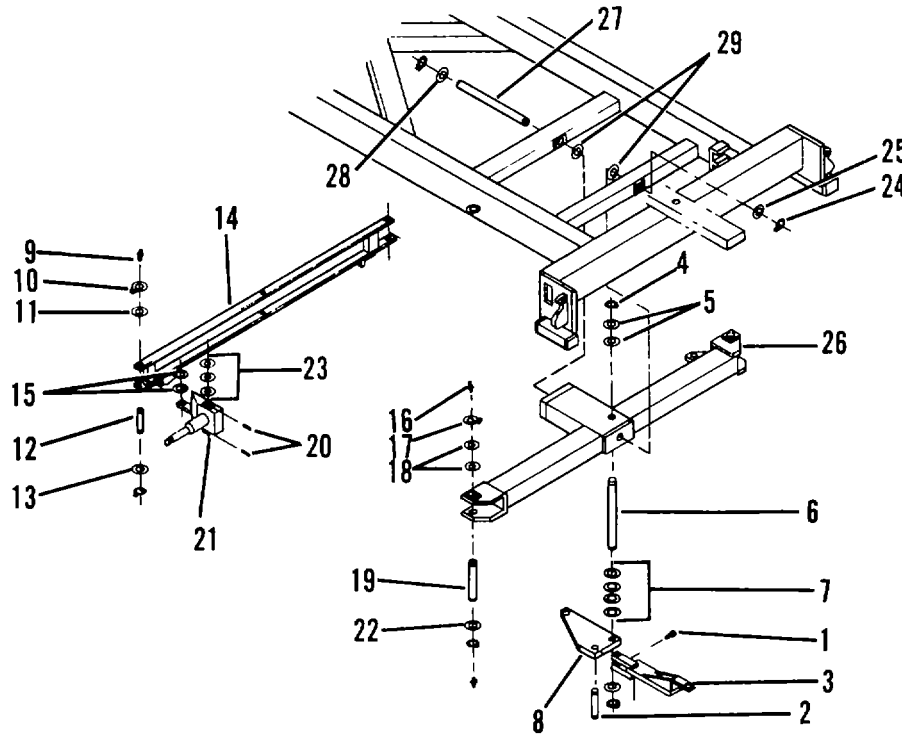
Steering Assembly (Sheet 2 of 3).
